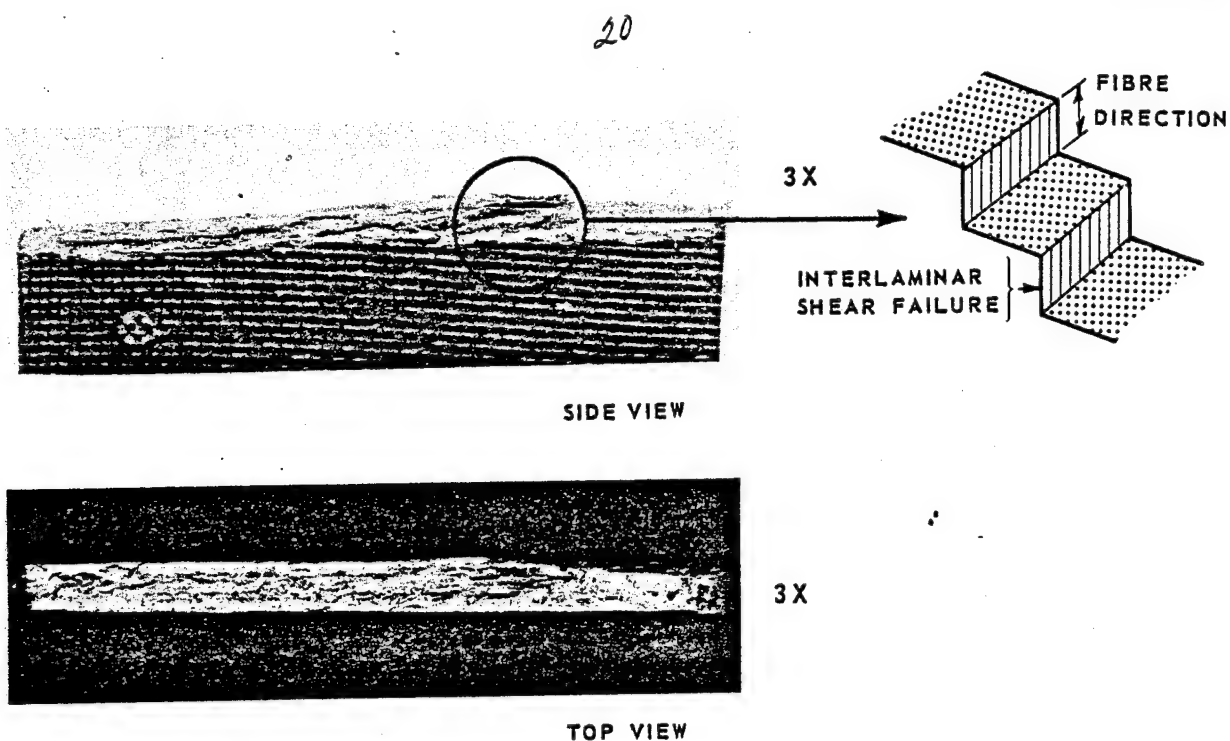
Compressive fracture surfaces of a carbon/epoxy specimen
